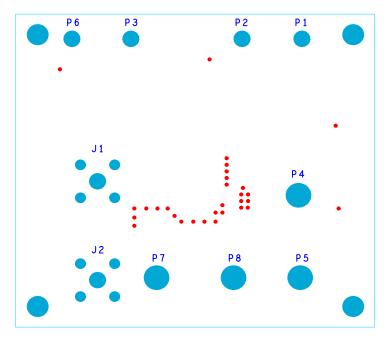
BOTTOM LAYER COMPONENTS (MIRRORED)
